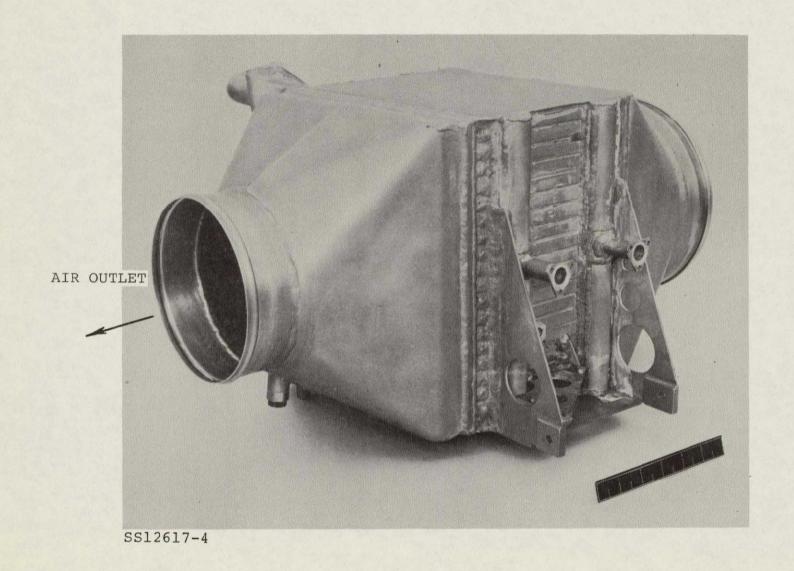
3/4 VIEW - SECONDARY SIDE
